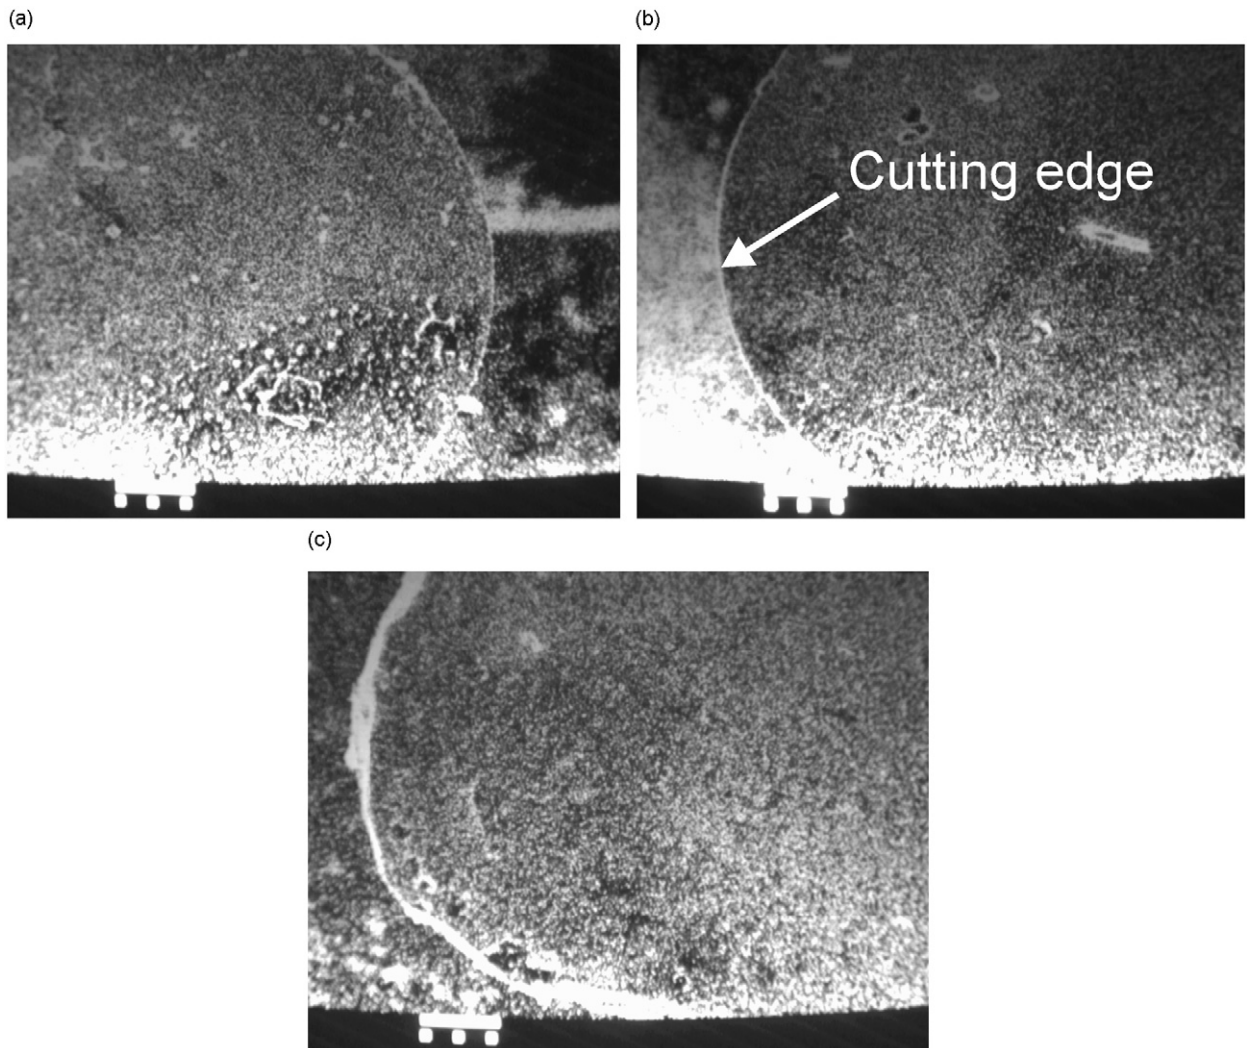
SEM images of cutting edge of turning tool insert ($100\times$, length of white bar= $100\ \mu\text{m}$): (a) new tool insert, (b)—tool insert used in vibration turning and (c)—tool insert used in conventional turning.
